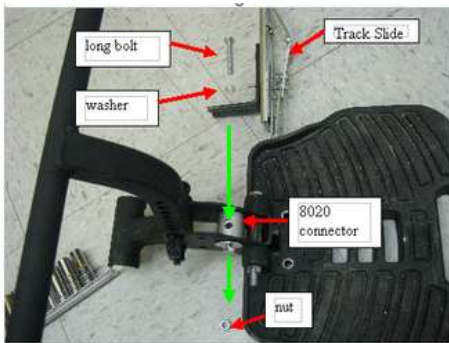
exploded view of attaching the track slide to the 8020 connector. Green arrows represent the bolting action.
